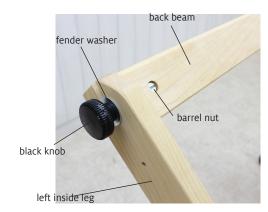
INSTALL THE REMOVABLE BACK BEAM
